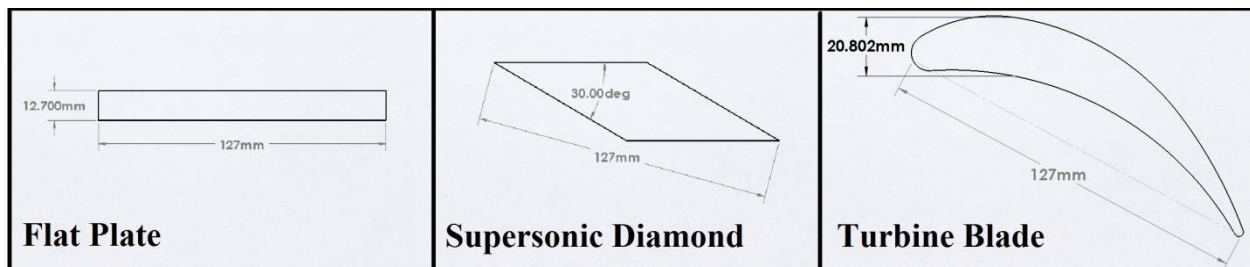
CAD (SolidWorks) drawings of the three airfoil geometries used in this project (not to scale)
